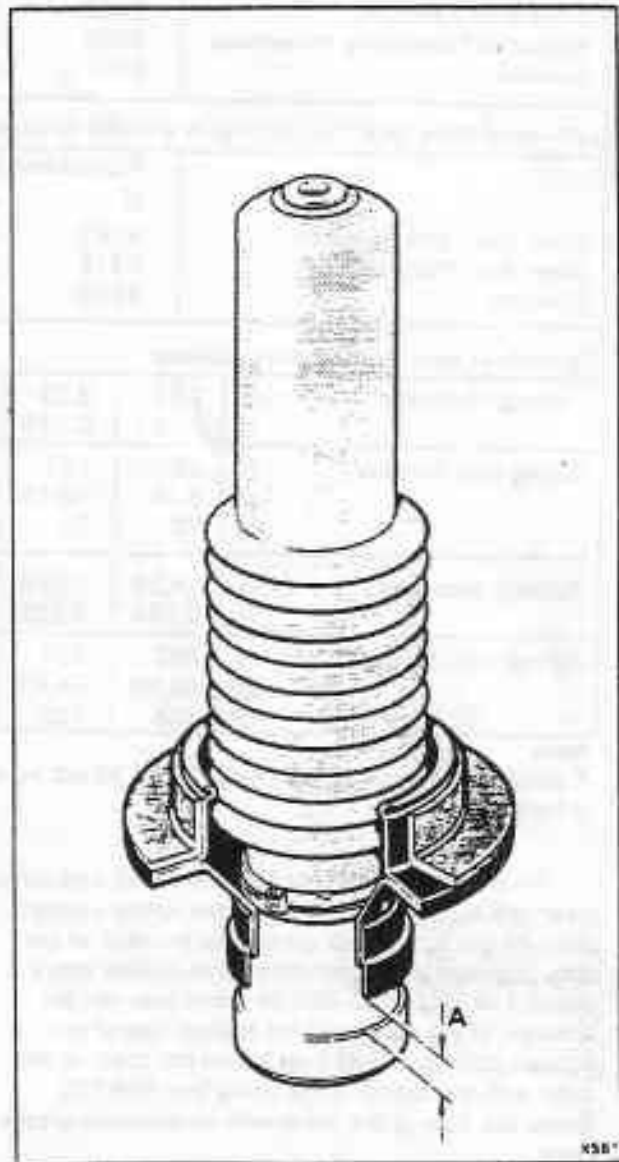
Spring support plate, collar, and sleeve assembly
